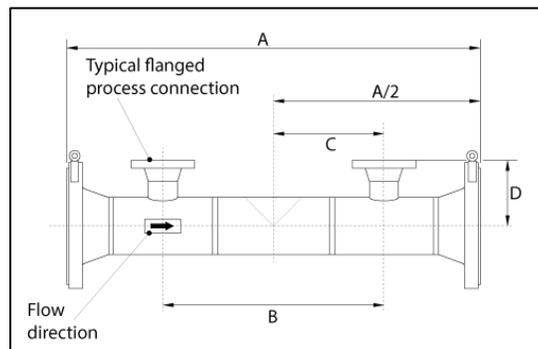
Tek-DP 1670A With Flanged Tapping's and RFWN End Flanges (1 ½", 2 and 3")
